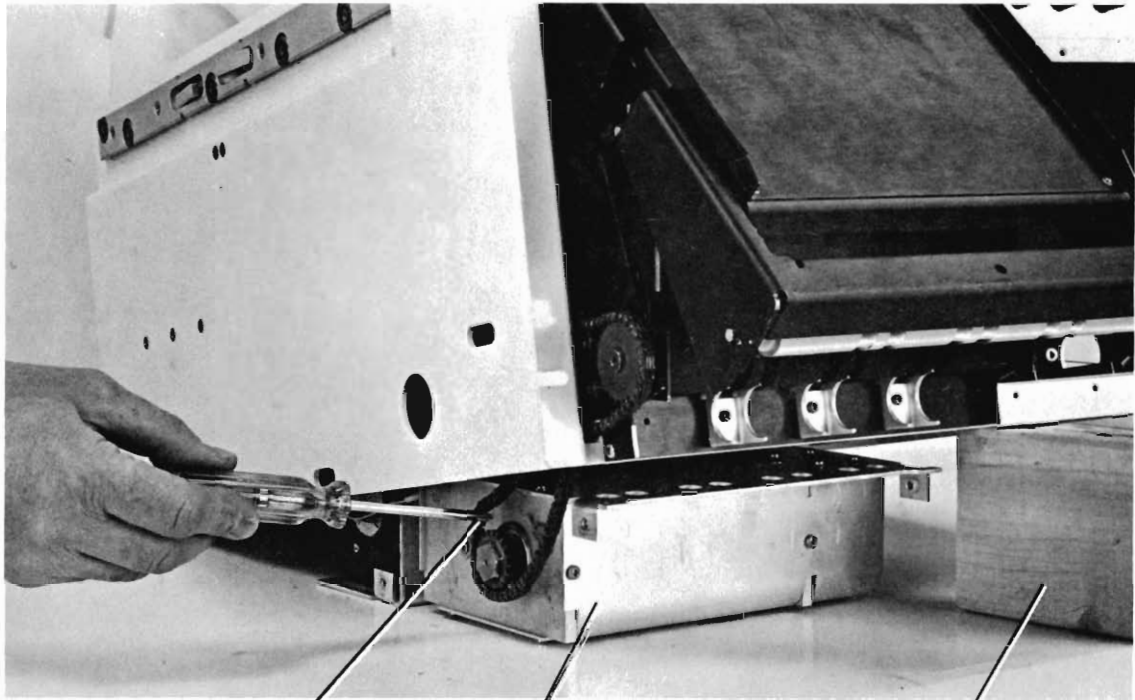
Gearbox Inspection and Solenoid Adjustment
